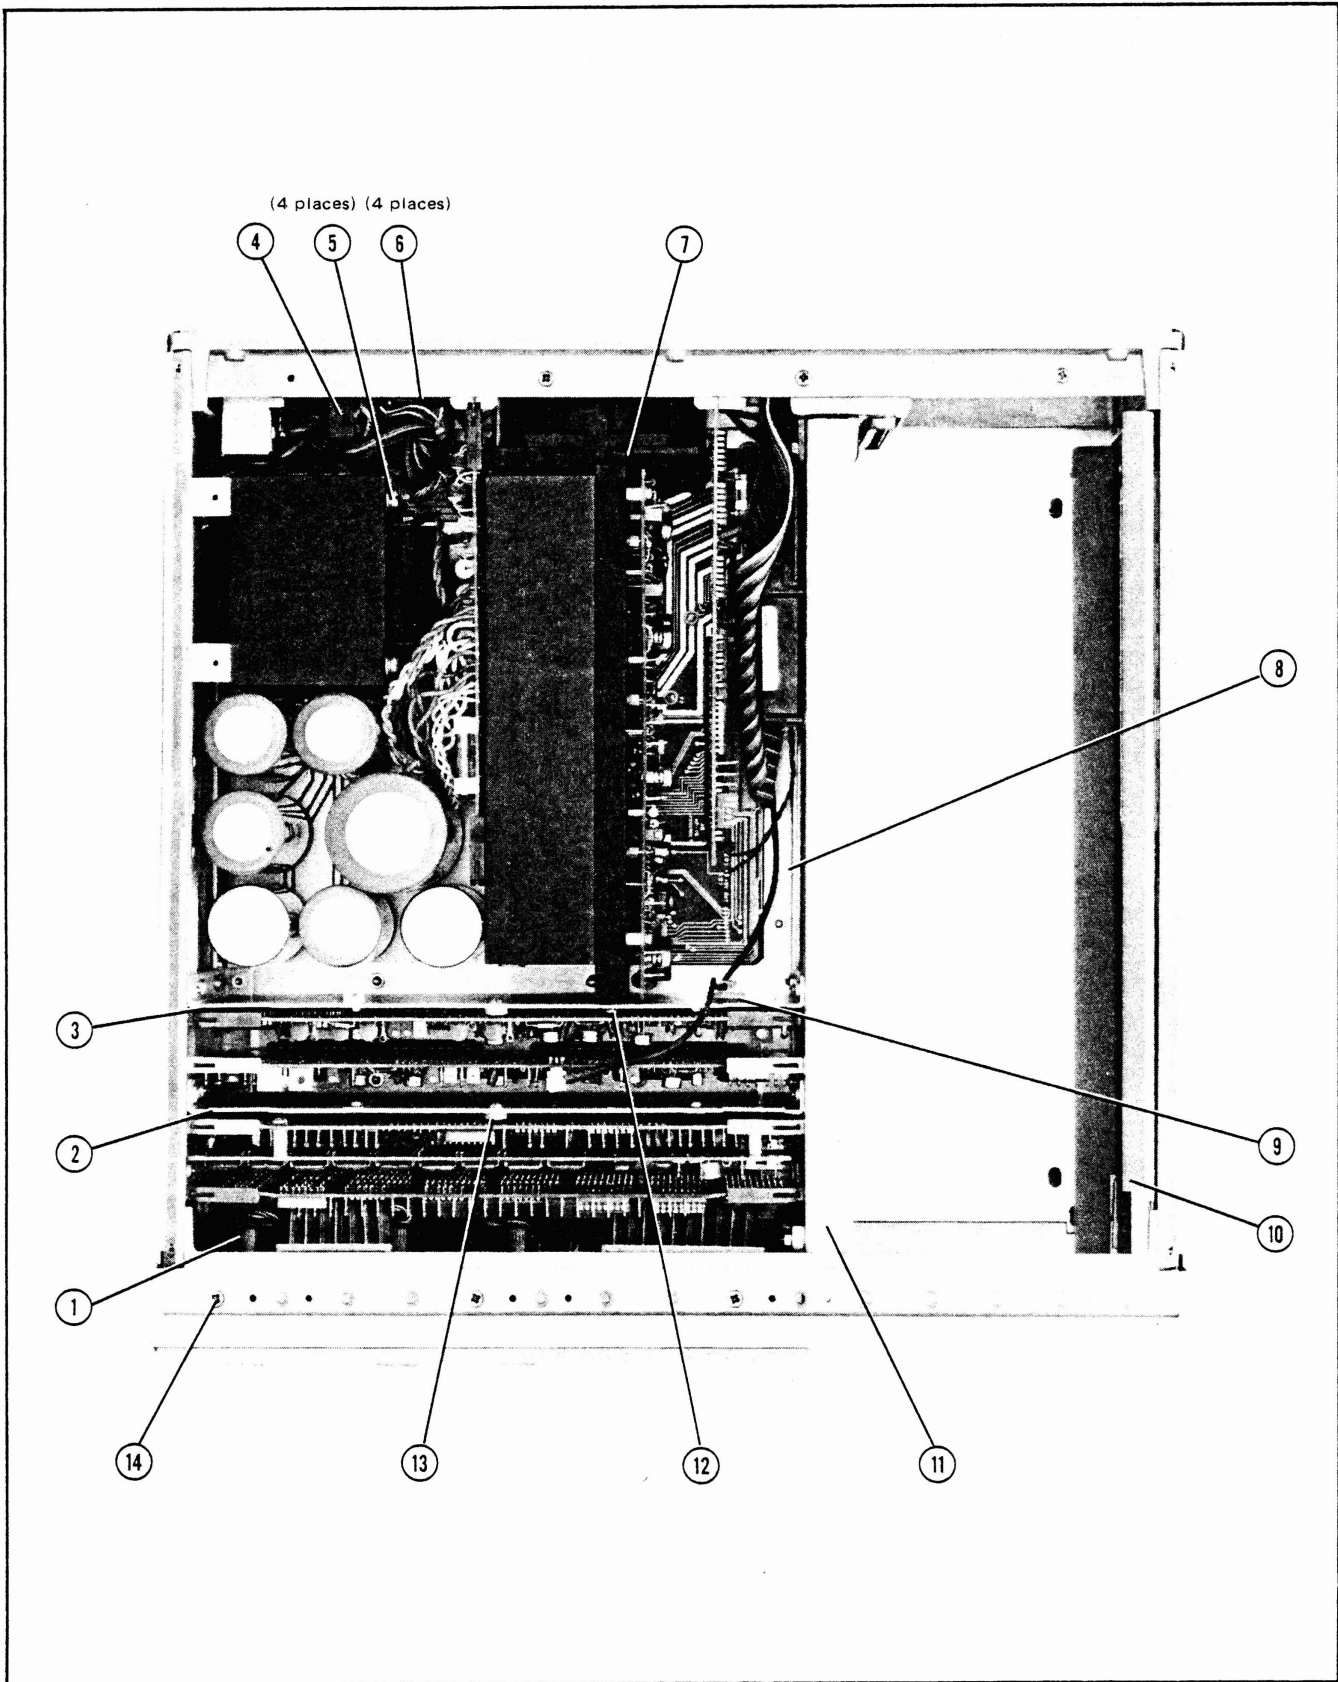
Top View Without Covers, Parts Identification (1 of 2)
